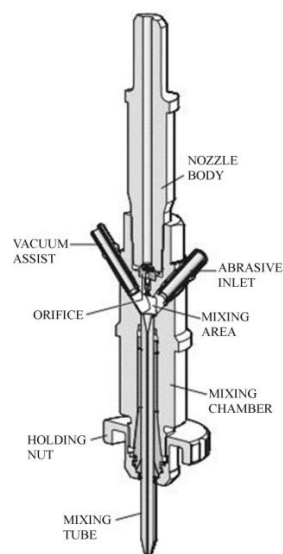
Cross-sectional view of an ASWJ cutting head.
